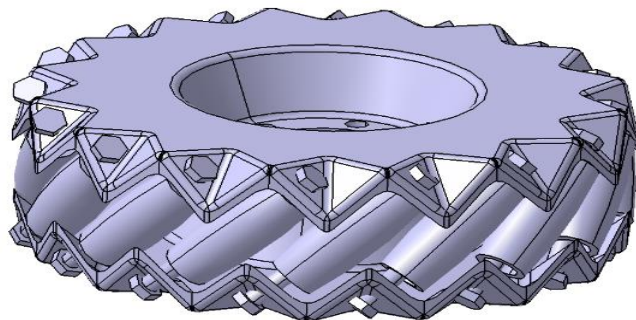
Mecanum Wheel Design 2 Designed Using GSD and Part Design Workbench
